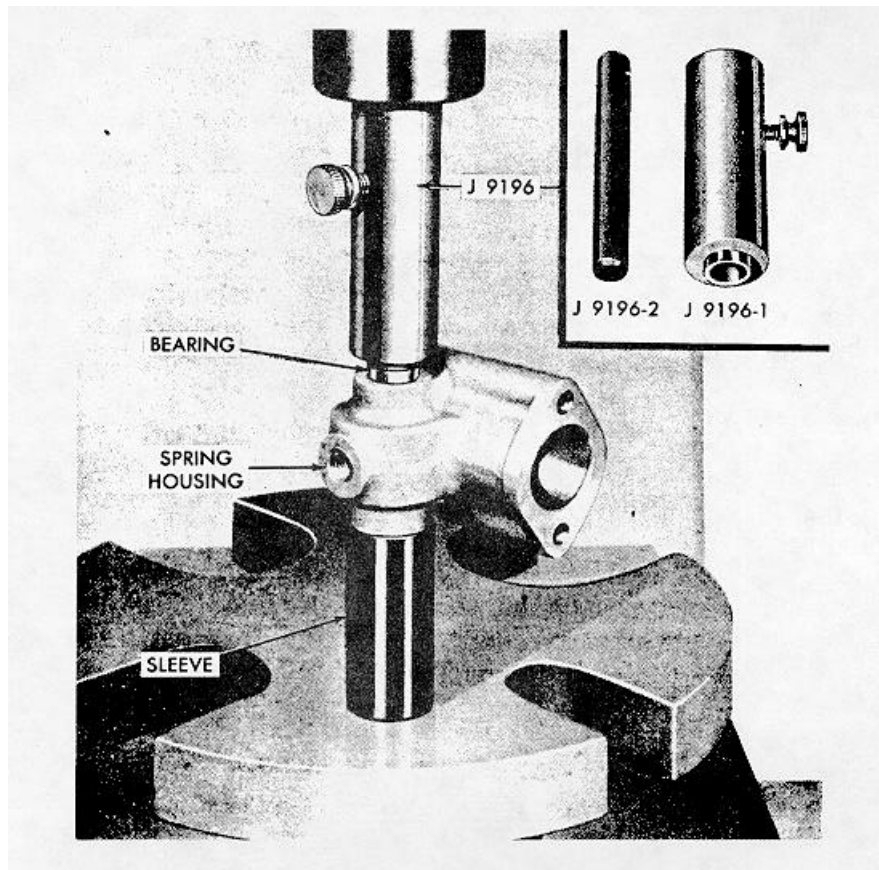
Installing Speed Control Shaft Bearings in Spring Housing.
